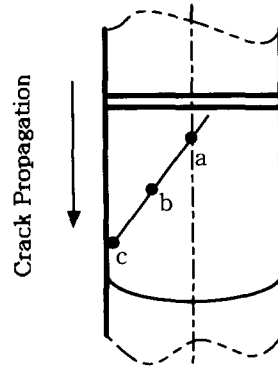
Picture Point of Fracture Surface for Shot-peening
